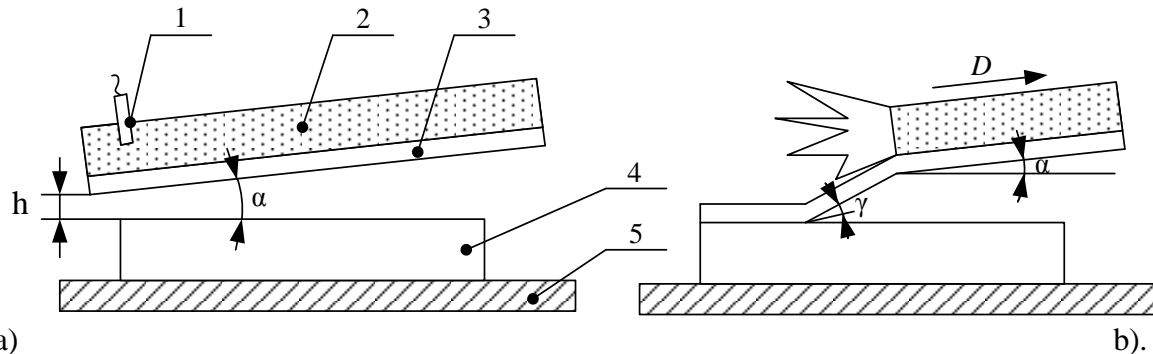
The angular diagram of explosion welding to the beginning (a) and the step of explosion (b): 1 – detonator 2 – explosive 3 – Metal plate 4 – the fixed plate 5 – Bearing.
